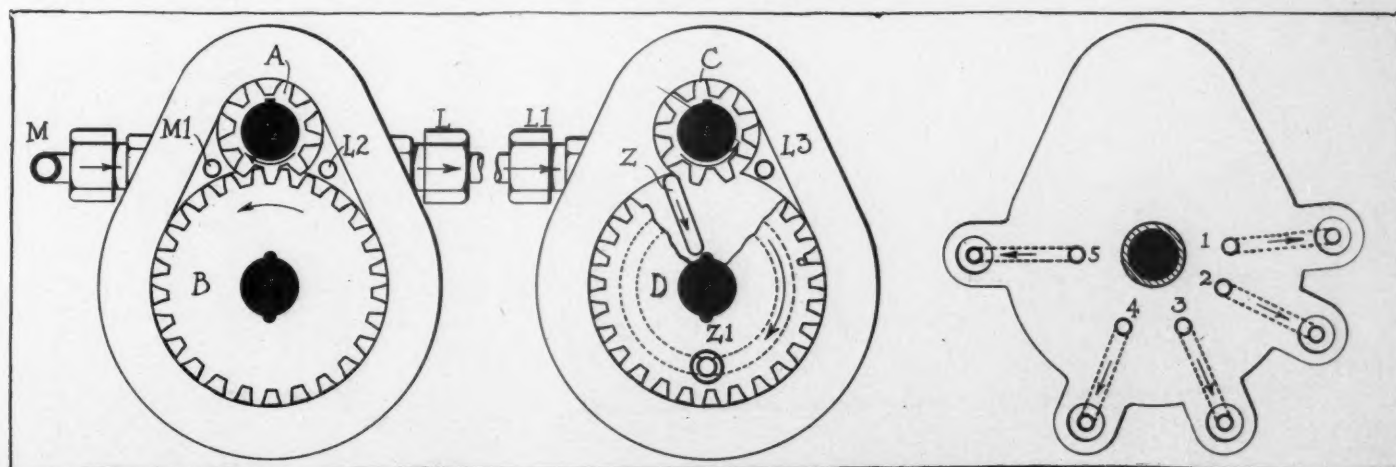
PARTS I, II AND III OF NEW MAXWELL DOUBLE GEAR OIL PUMP
